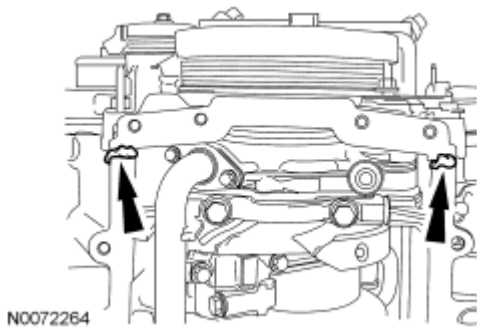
Applying Silicone Gasket & Sealant At Engine Front Cover-To-Cylinder Block Sealing Surface
